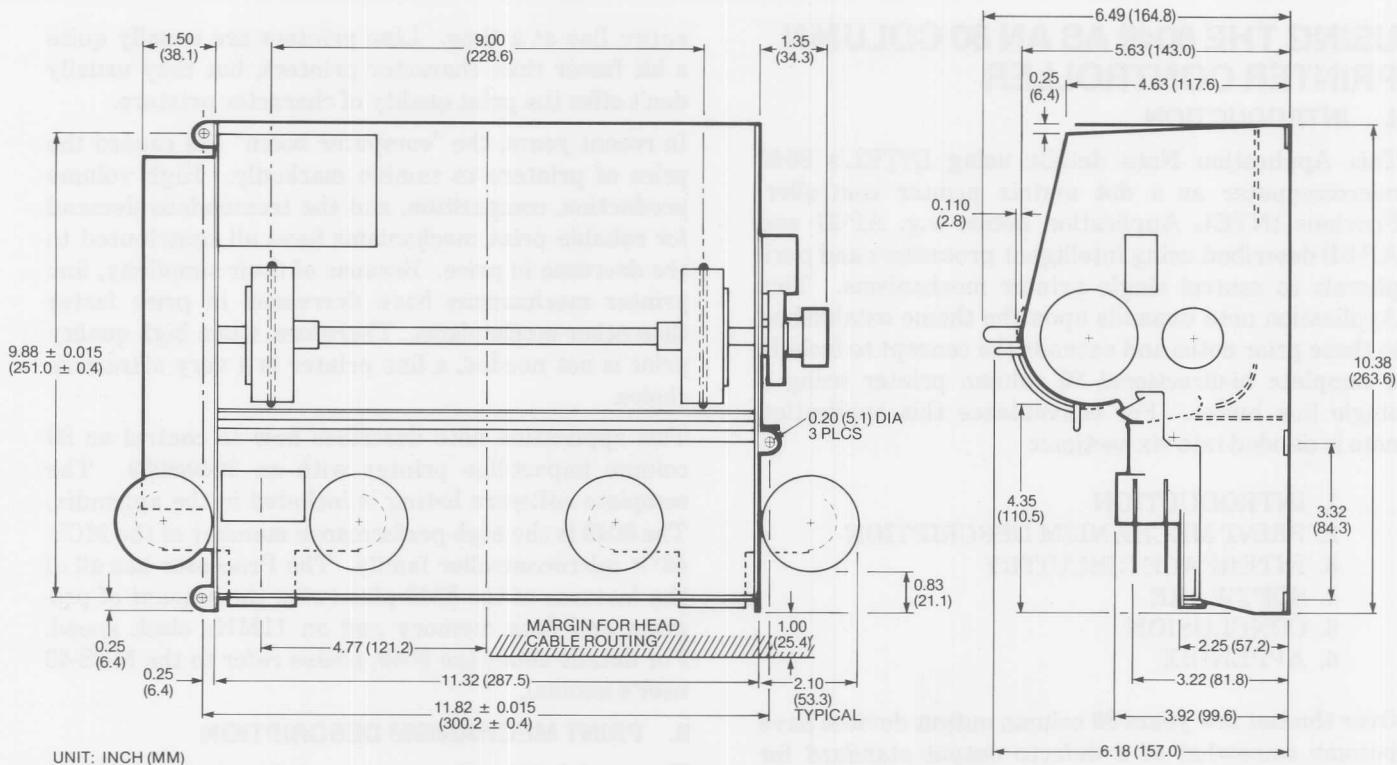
Physical Dimensions of C. ITOH Model 820 Printer
